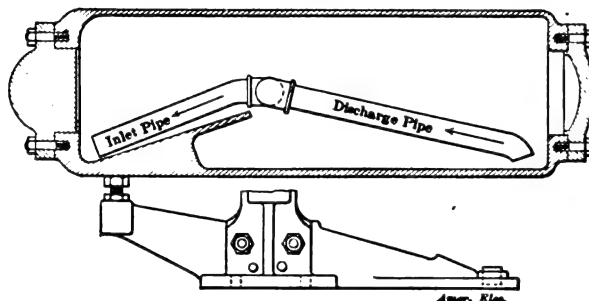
SECTIONAL VIEW OF "BONER" STEAM TRAP.
